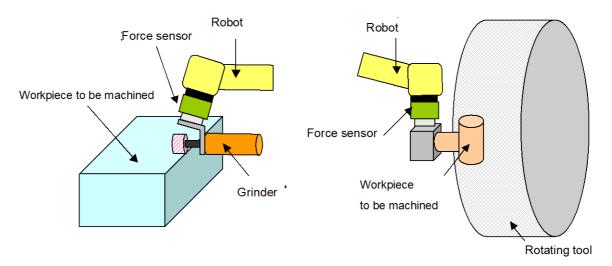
(a) Example of Surface Grinding (with Tool Held by Robot)
